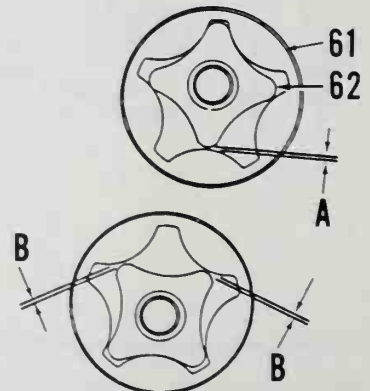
Refer to text for clearances (A&B) between oil pump outer rotor (61) and inner rotor (62).
